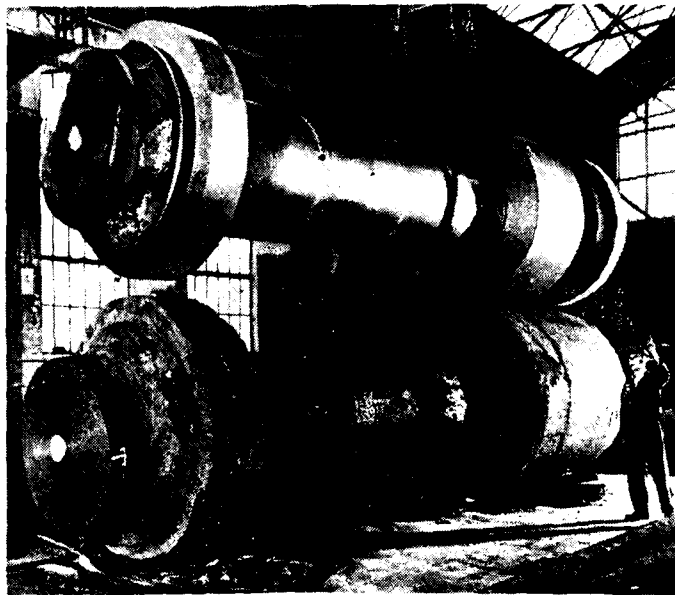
Black and rough machined forgings for the Priest Rapids alternator shafts.
